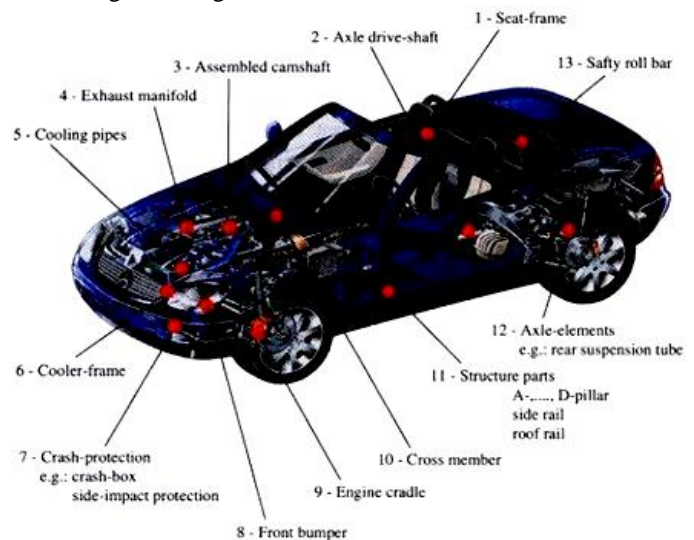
Examples of the automotive parts manufactured by tube hydroforming process.
